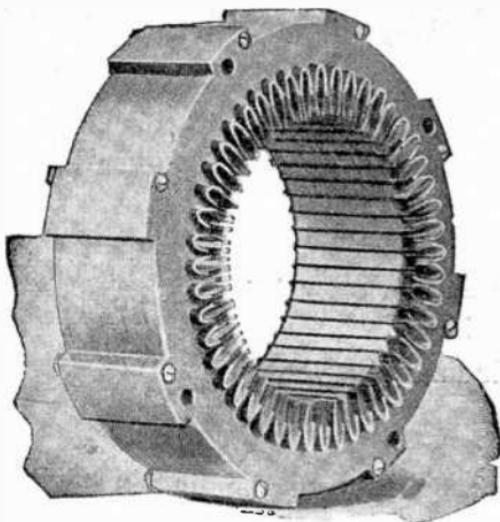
,171.—Master polyphase squirrel cage motor laminated field core with slot insulation in place.
